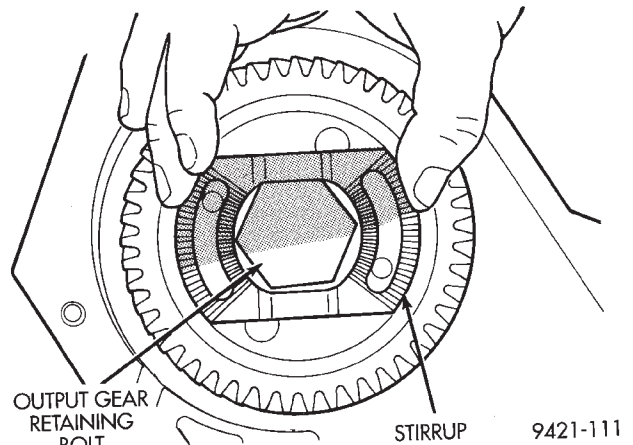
Output Gear Retaining Bolt Stirrup (Serration Side Out)
